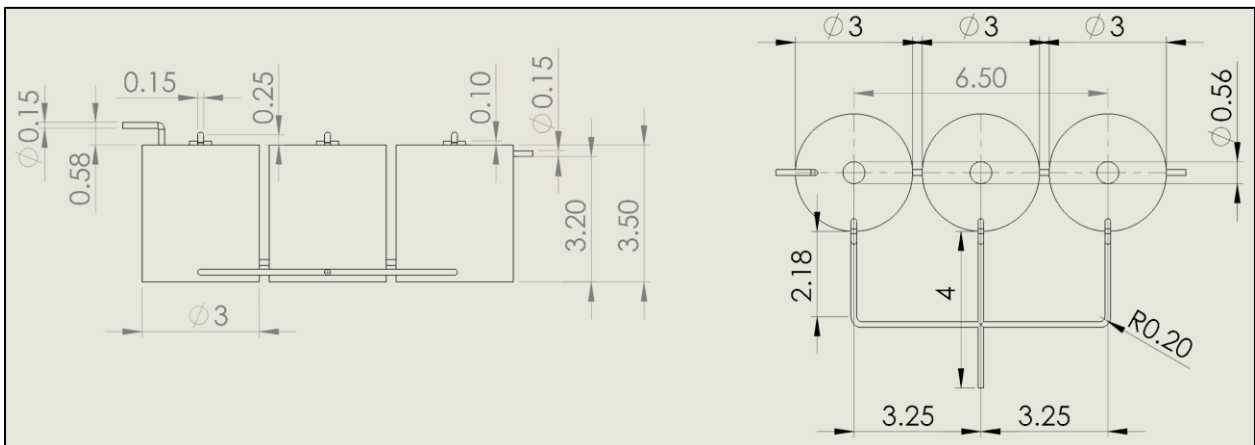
Dimensioned SolidWorks drawing of the above-ground tank system
